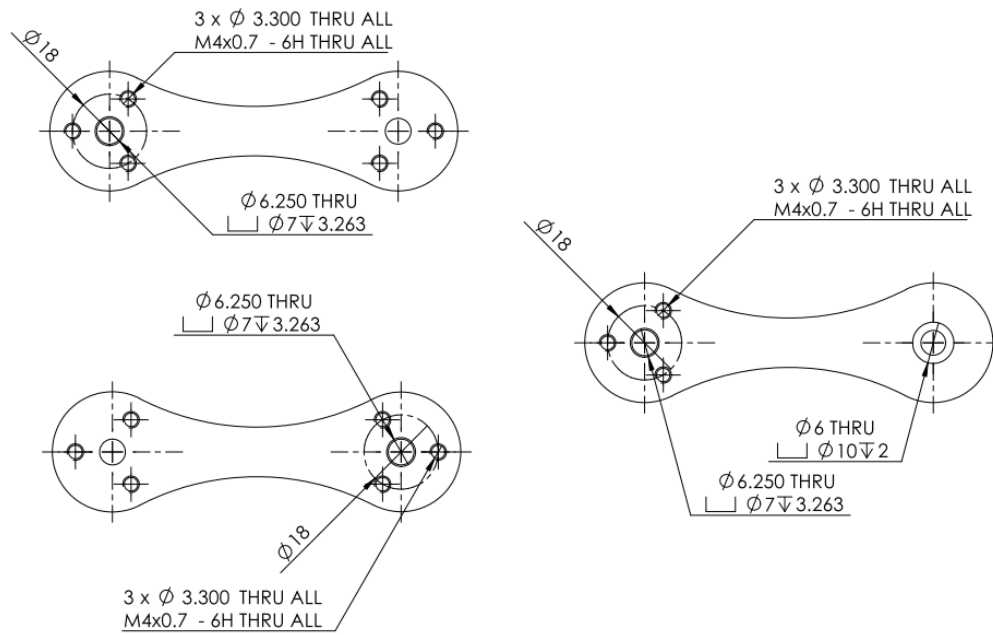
Secondary links designed to be water jet cut and drilled on a mill
